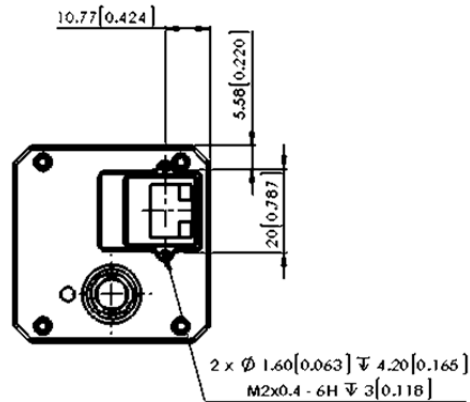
RJ-45 mounting post locations on rear of camera (all dimensions are in mm [in])
